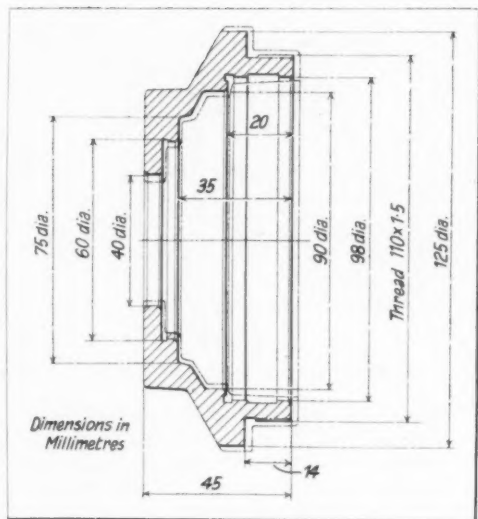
Sectional View of the Screwed Flange which is Machined from an Iron Casting with the Set-up shown in Fig. 1. The Outline of the Casting is Shown by the Chain-dotted Lines
